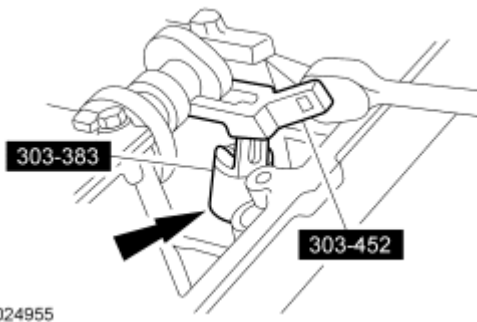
Installing New Valve Seal Using Special Tools (303-383) & (303-452)
